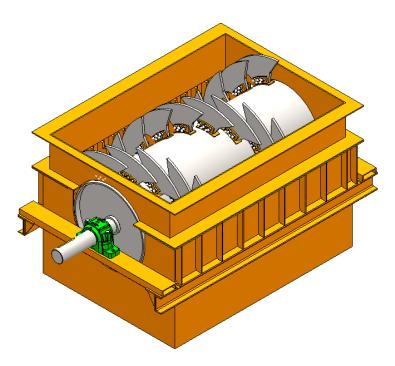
Blades arrangements with drum design assembled with the cutting chamber.
